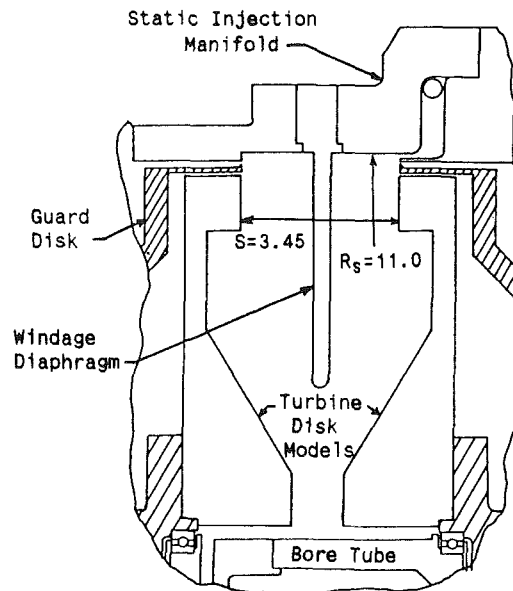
Sketch of the test assembly with turbine disk models and windage diaphragm installed
